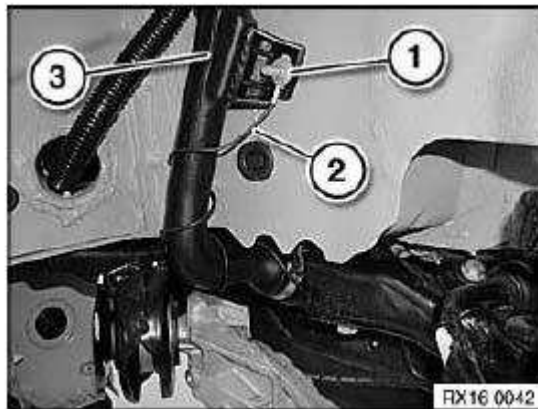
Grounding Cable, Fuel Filler Pipe And Mounting Nut
